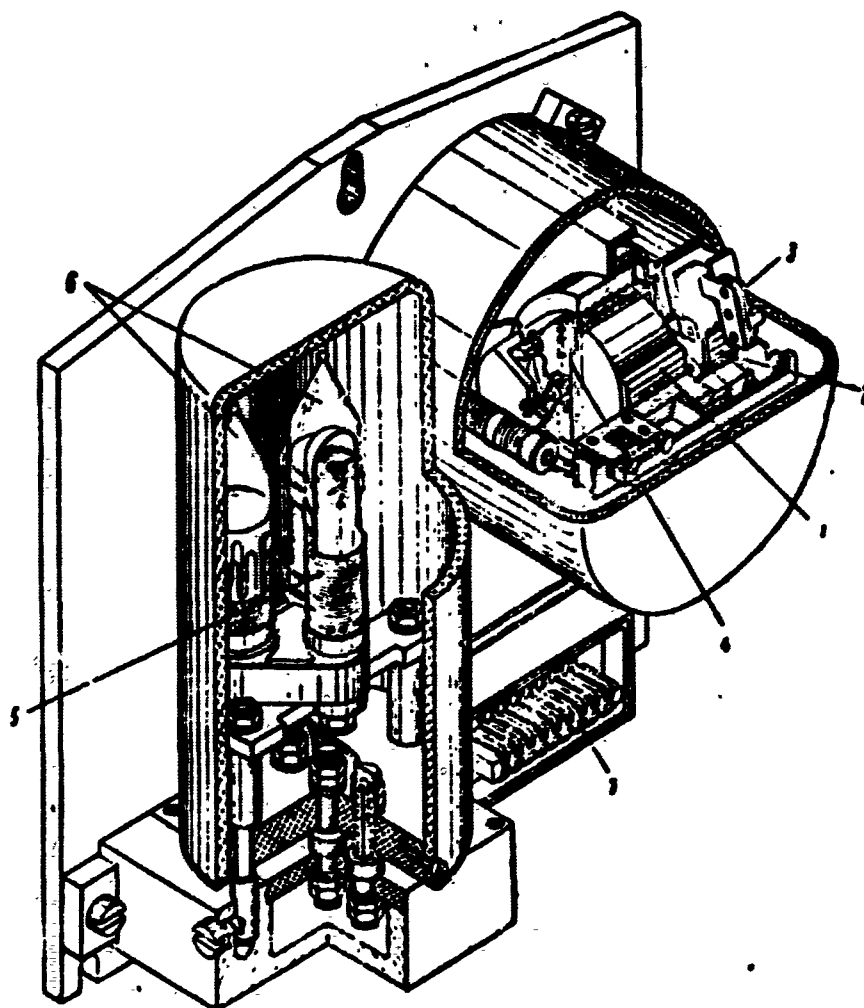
General form of an electrolytic integrator. 1 - lever; 2 - flag; 3 - electromagnet; 4 - balancing coil; 5 - thermo-relay; 6 - electrolytic elements; 7 - plug block.
